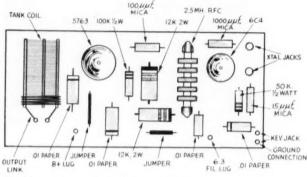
Top pictorial view of component placement layout. This should be drawn on semitransparent paper so wiring layout can be added to the underside of the drawing.
